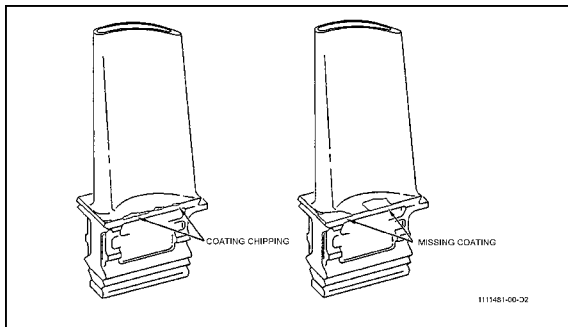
Missing Coating at Stage 2 Blade Platform
